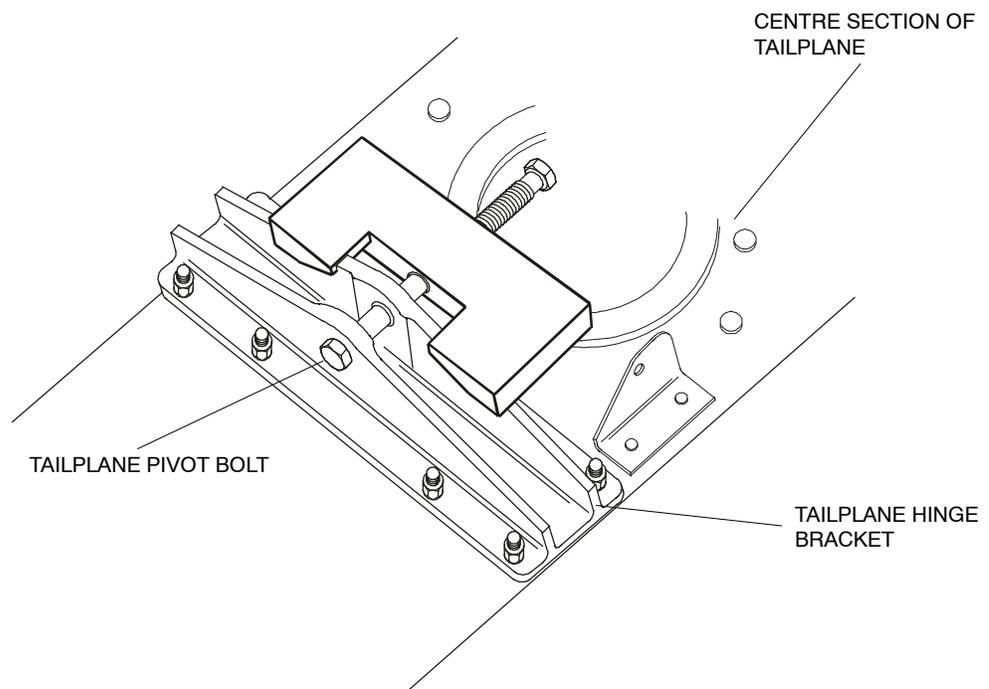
Tailplane Pivot Bolt Extractor Tool Installation
